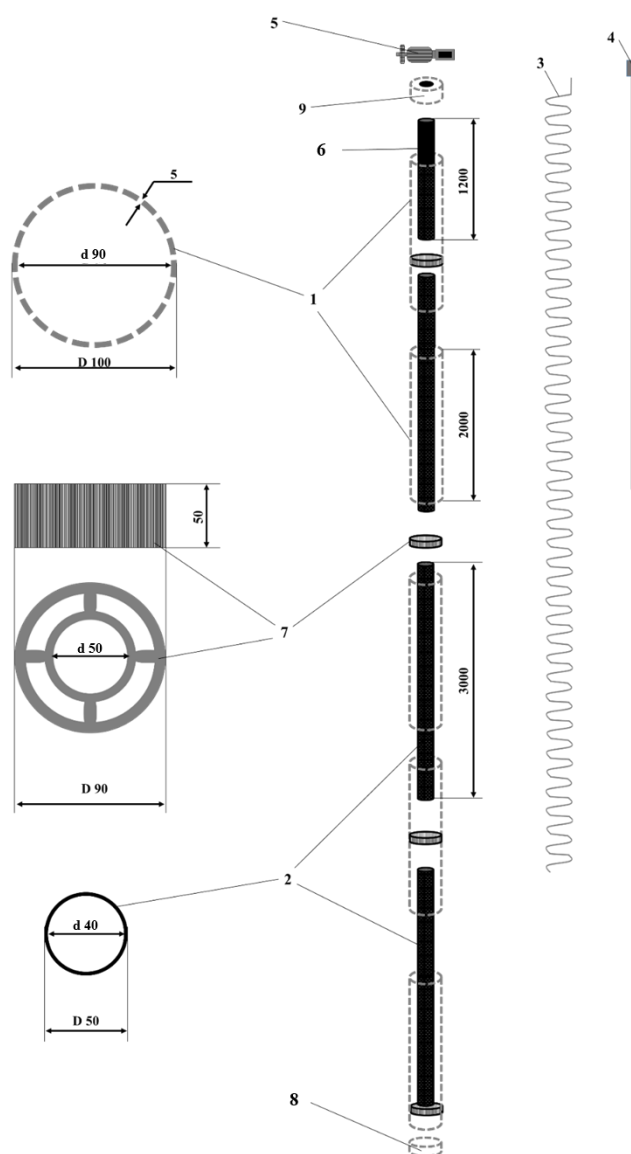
Assembly schematic of perforated-tube segments for a 10 m borehole. 1 – outer perforated tube segments (D=100 mm); 2 – inner perforated tube segments (D=50 mm); 3 – heating cable wrapped around inner tube; 4 – temperature sensor; 5 – flow-control assembly; 6 – upper segment of inner tube; 7 – centralising coupling flanges; 8 – bottom plug of outer tube (non-perforated above heap surface); 9 – top plug of outer tube.
